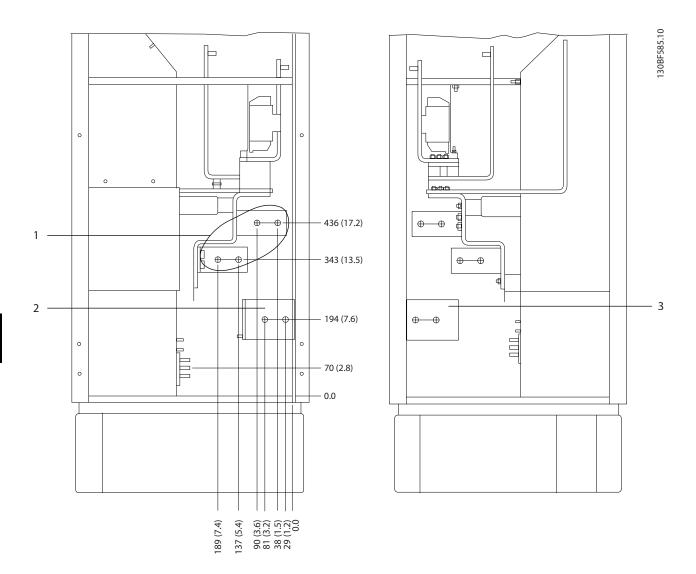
Terminal Dimensions for F1-F4 Rectifier Cabinet, Front View
